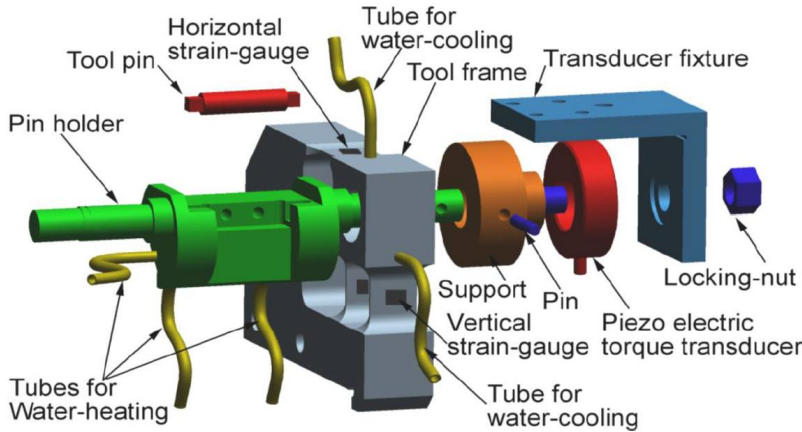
Illustration of the Bending Under Tension (BUT) equipment [45].
